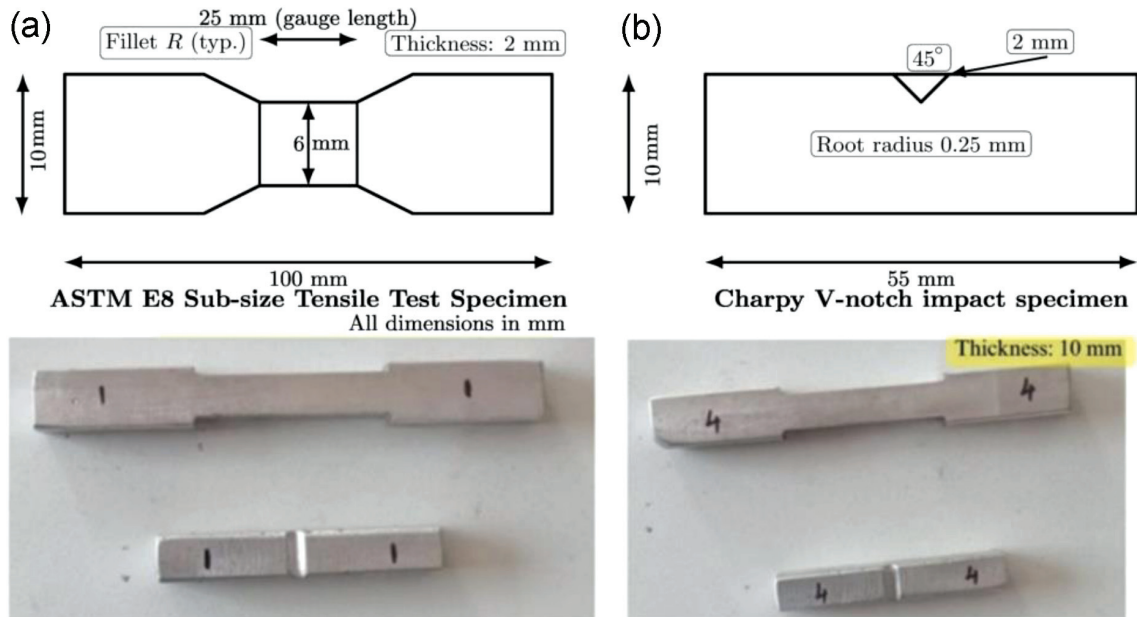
a) ASTM E8 subsize tensile specimen before and after fracture; b) V-notched impact specimen before and after fracture
